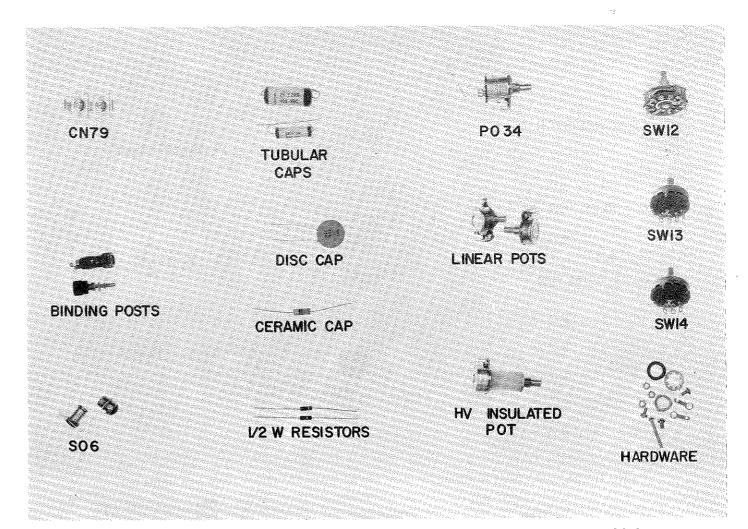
B. The parts used in assembly and wiring of front panel are shown above and listed below.
